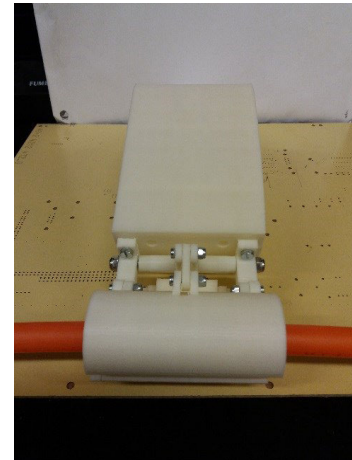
Prototype OFEF joint welding machine.
